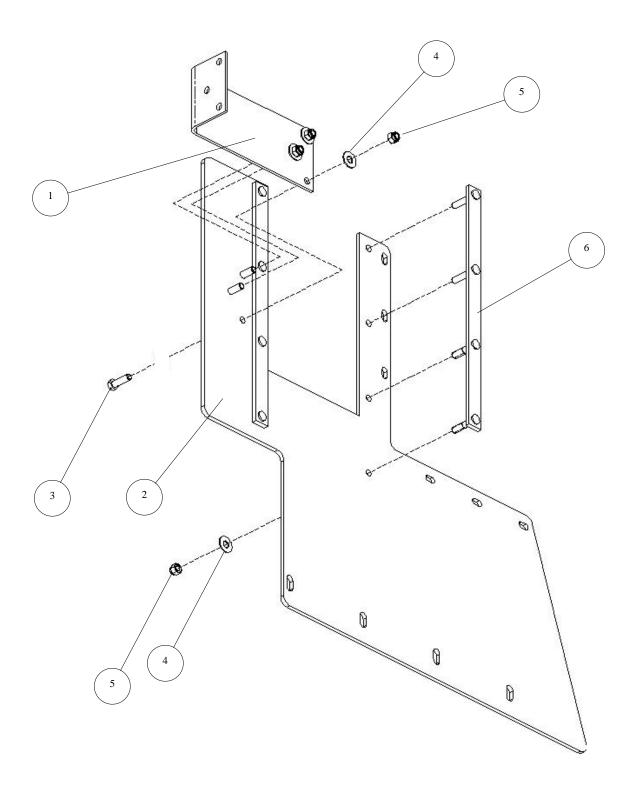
Doghouse Right Panel Pre-Assembly.
